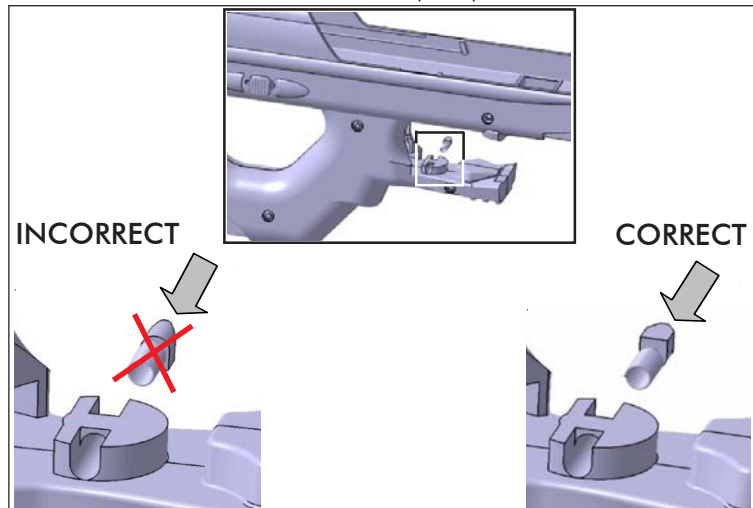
t - Reassembly of the first plunger, selector (253/B)
